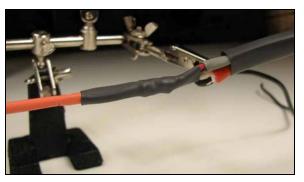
Connection Soldered and Heat Shrink Tubing Applied
